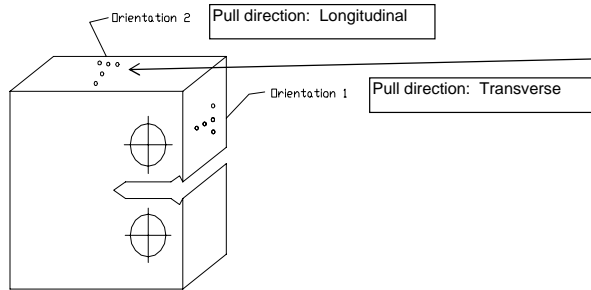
The specimens were cut from the discs removed from the prototype as shown above. The "D" disc was cut and welded as shown in Fig. B, below; the specimens for this are labeled "TW". The other specimen labels correspond to the disc identifier (ie., A from A disc; B from B disc; C from C disc).. As indicated in Fig. A and B, the punch marks on the samples indicate the circumferential (Longitudinal)
